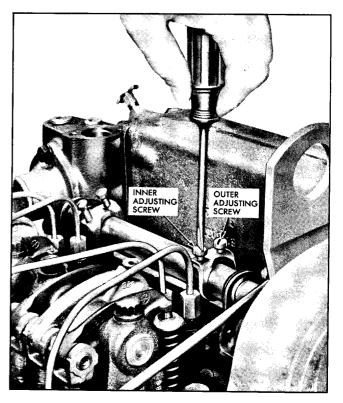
Adjusting Height of Rack Control Lever Adjusting Screws
